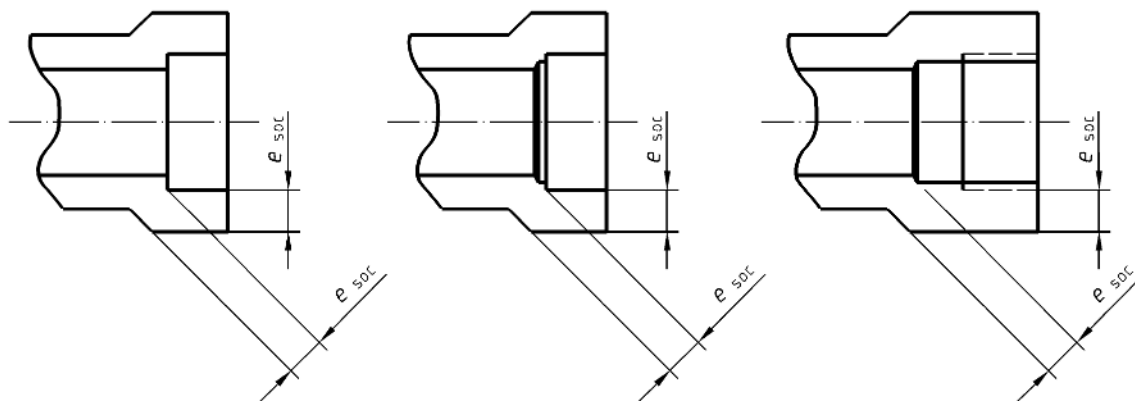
Wall thickness,  $e_{soc}$ , for socket welding and threaded ends
